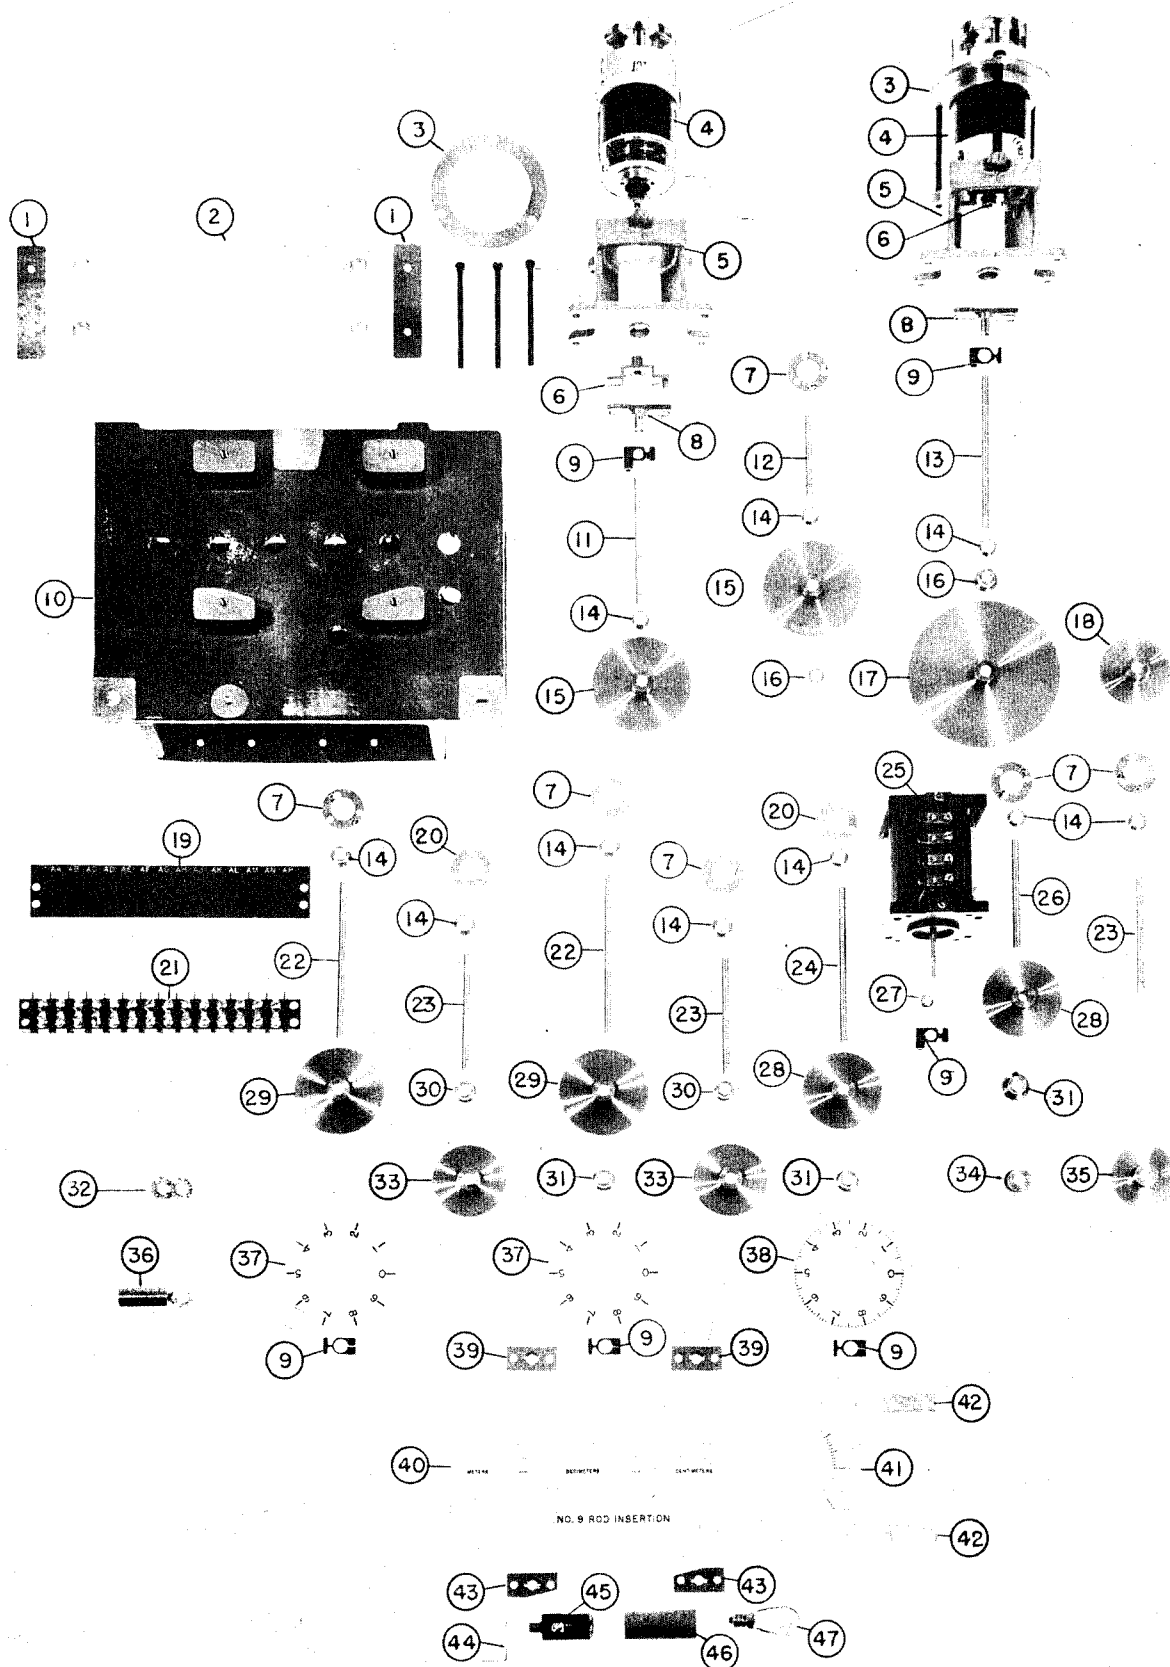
REGULATING-ROD POSITION INDICATING UNIT
